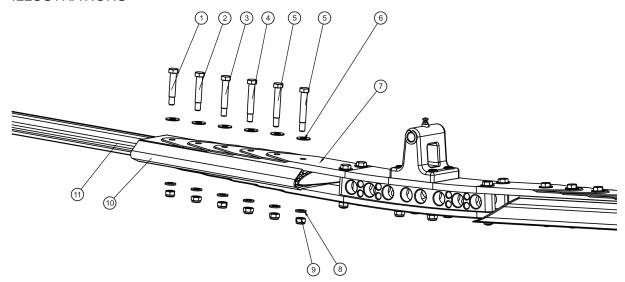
Disassembly rotor - teetering parts (Effectivity: RS II)
